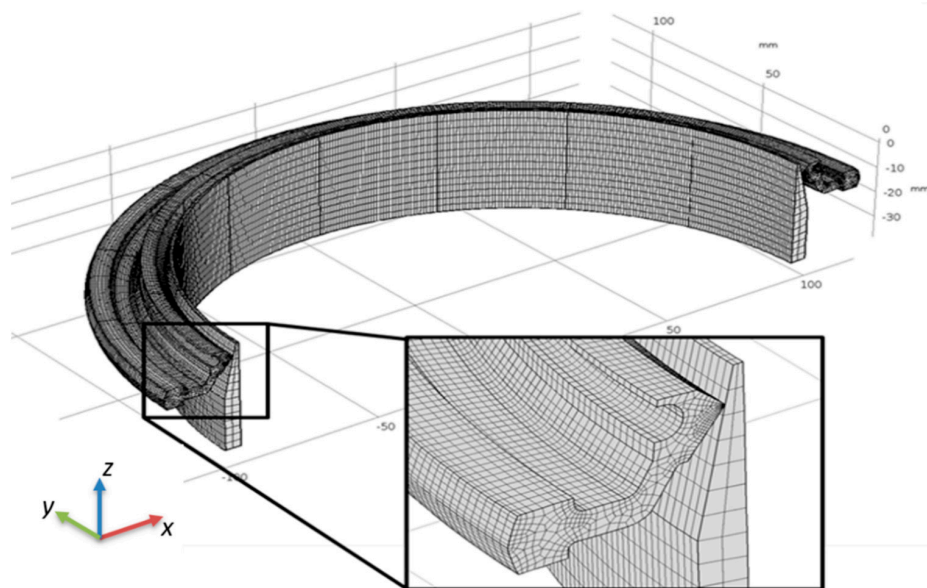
Three-dimensional model of the seal. Note the taper shaft part required for its concentric assembly.
